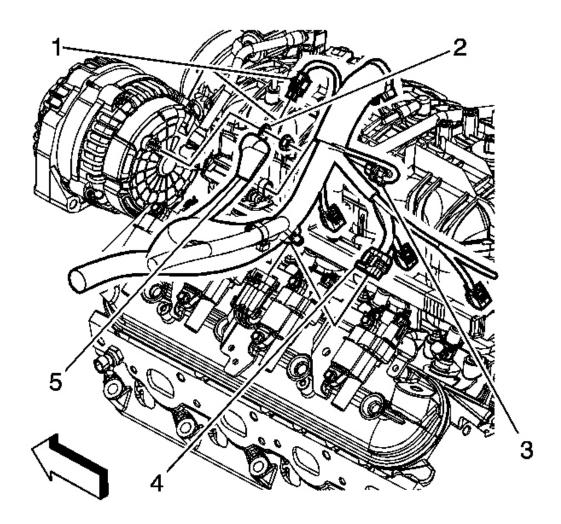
Engine Wiring Harness/Positive Battery Cable Boot Courtesy of GENERAL MOTORS CORP.
